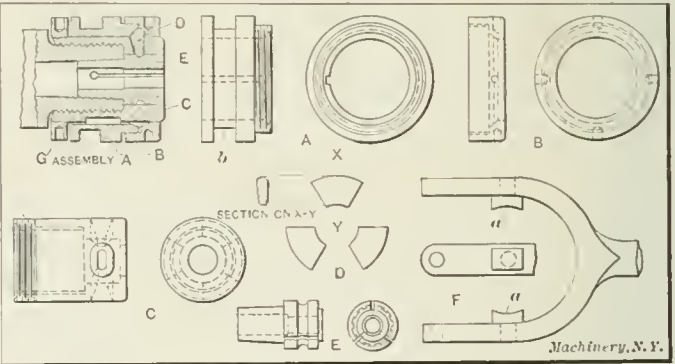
Details of the Grip Chuck used on the Pratt & Whitney Hand Miller
